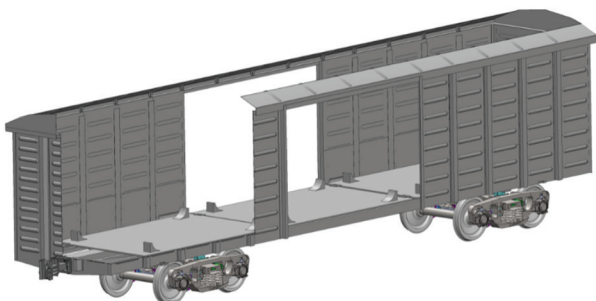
Arrangement of supporting sectors for military equipment in a covered wagon
